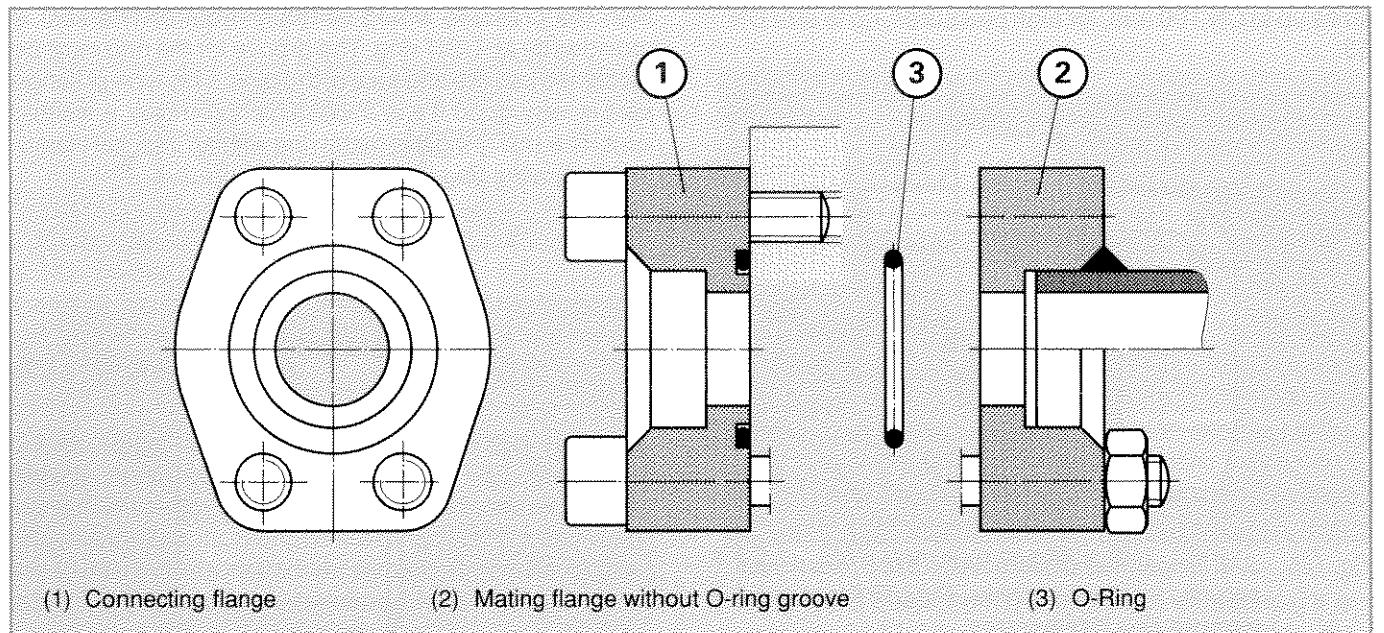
SAE flange and flange joint, securing function by screws, flange joined to pipe by fillet weld, elastic seal usually an O-ring
